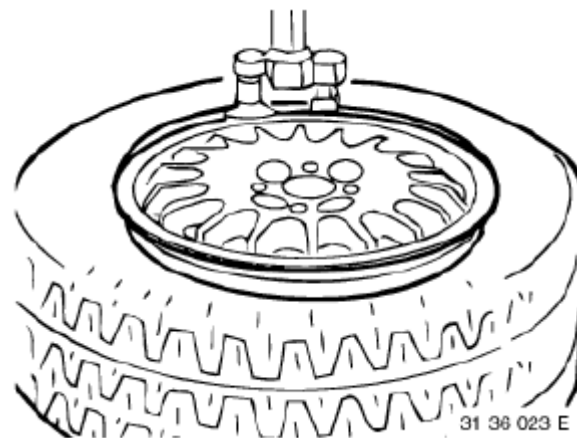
Pressing Upper Tire Bead Under Mounting Finger
